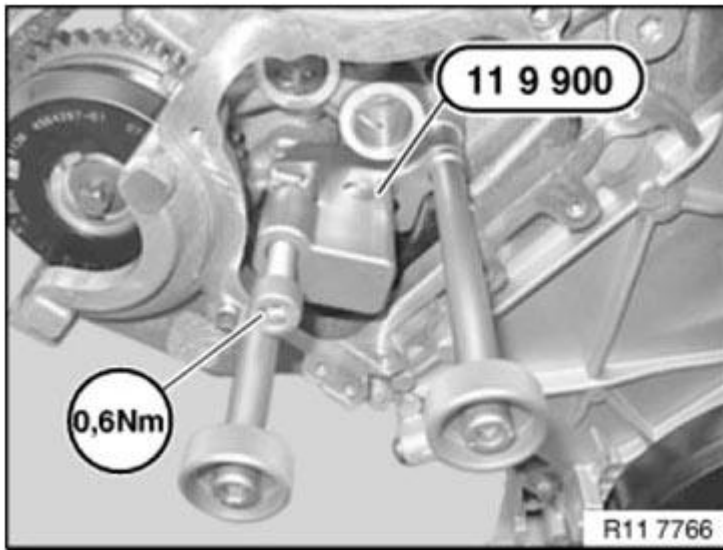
Preloading Hexagon Socket Screw With Special Tool 00 9 250 To 0.6 Nm
